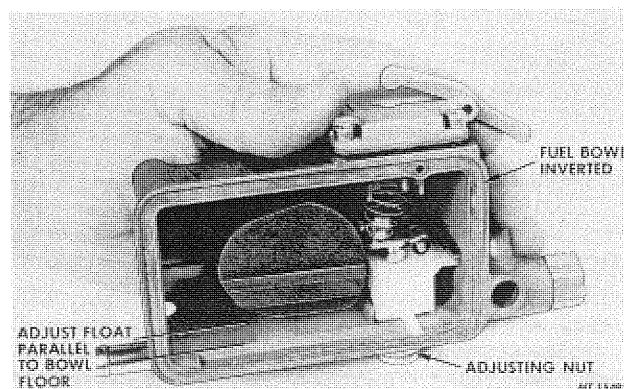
Preliminary Float Adjustment Externally Adjustable Fuel Inlet Valve — Internally Adjusted Fuel Inlet is Similar
